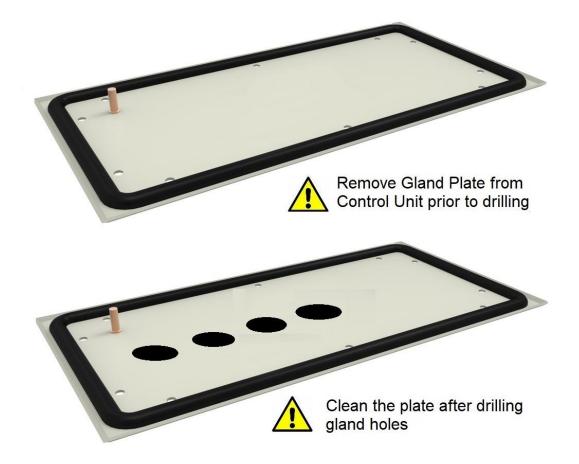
Remove the gland plate from Control Unit before drilling holes
